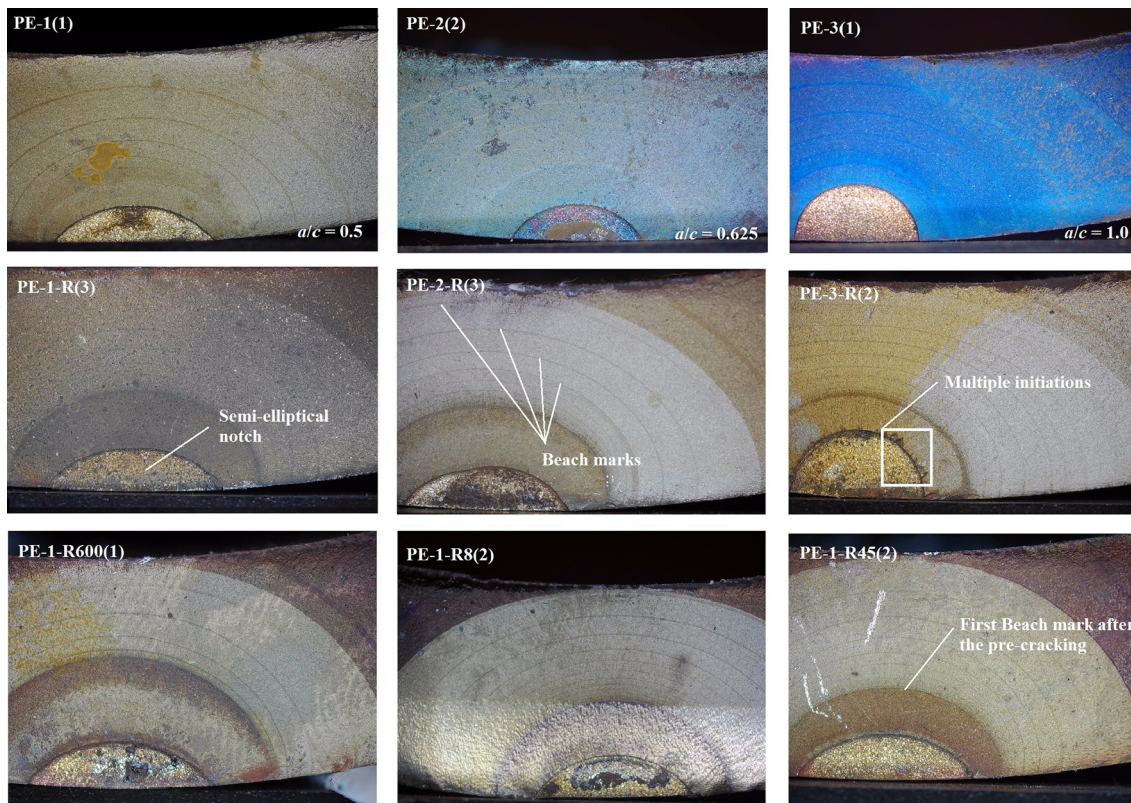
Beach marks on the cross-section of the steel pipe specimens.
